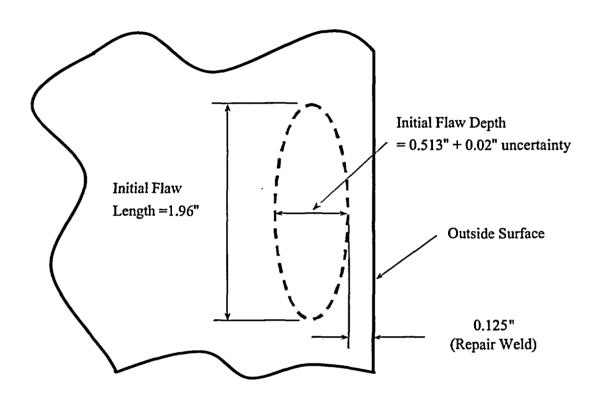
Sketch of Model Used for Crack Propagation Through the Embedded Flaw Repair Weld
